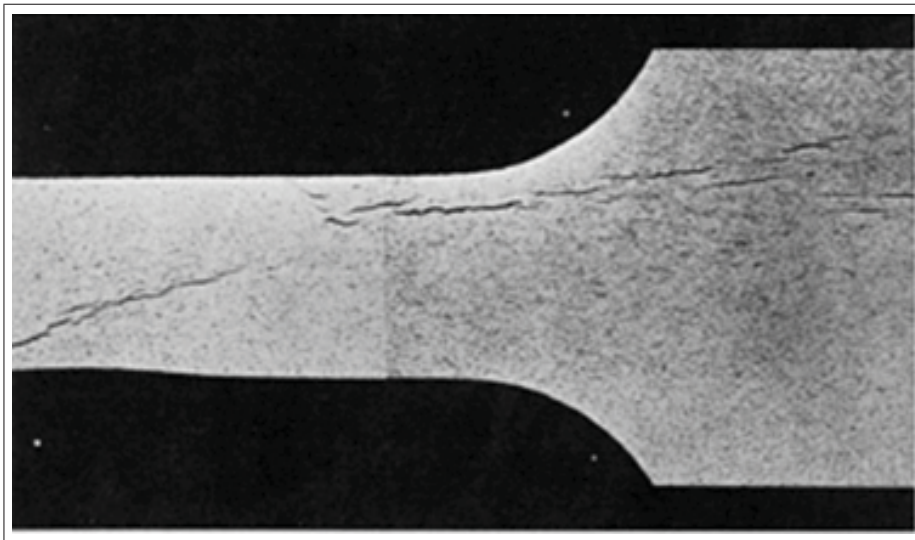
Forged alloy 7075-T6 part which contains shrinkage cavities and internal cracks formed during the solidification during the casting.
